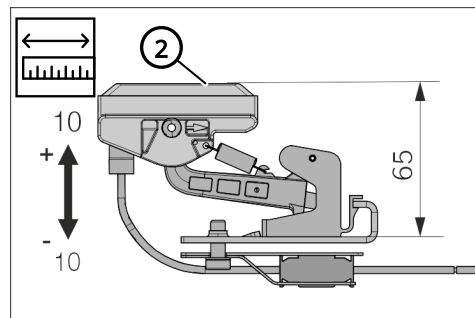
Check the installation dimensions of the single current collector and contact force. The working stroke must not be exceeded or fall short.
